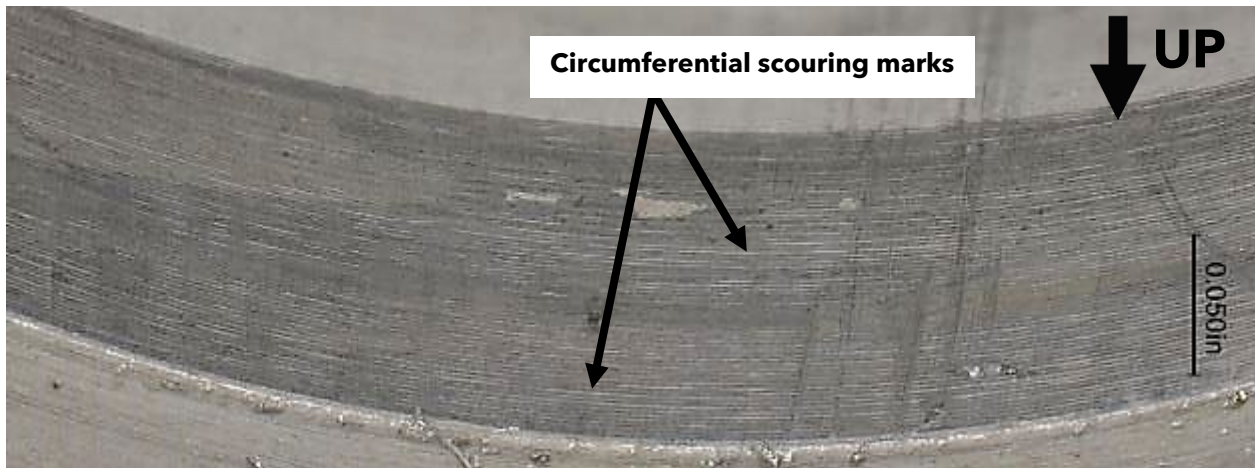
Inner surface of barrel showing circumferentially oriented scouring marks in the area that corresponded to the upper bearing assembly (after cleaning).
